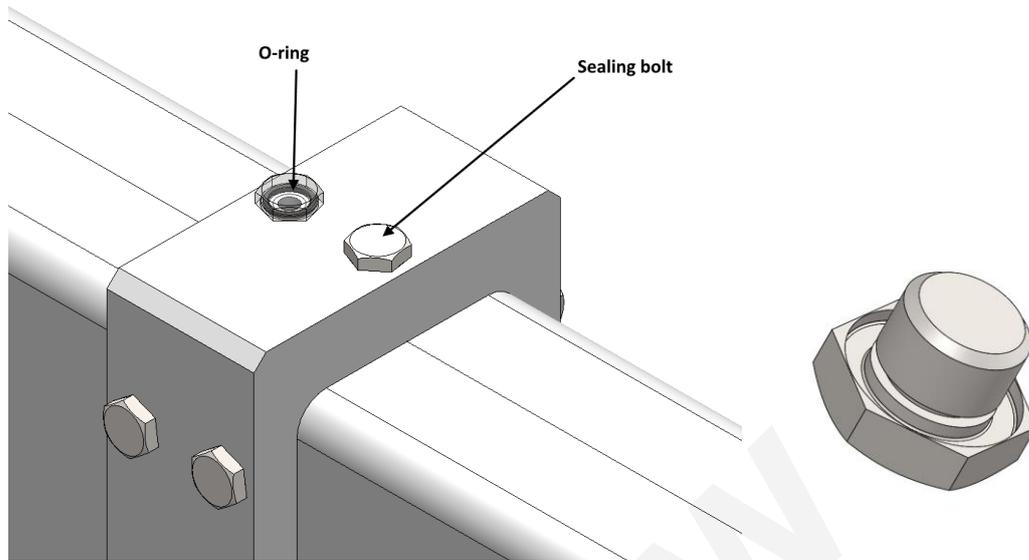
Left – sealing bolt and sealing O-ring on a flange. Right – groove in a sealing bolt for the O-ring.
